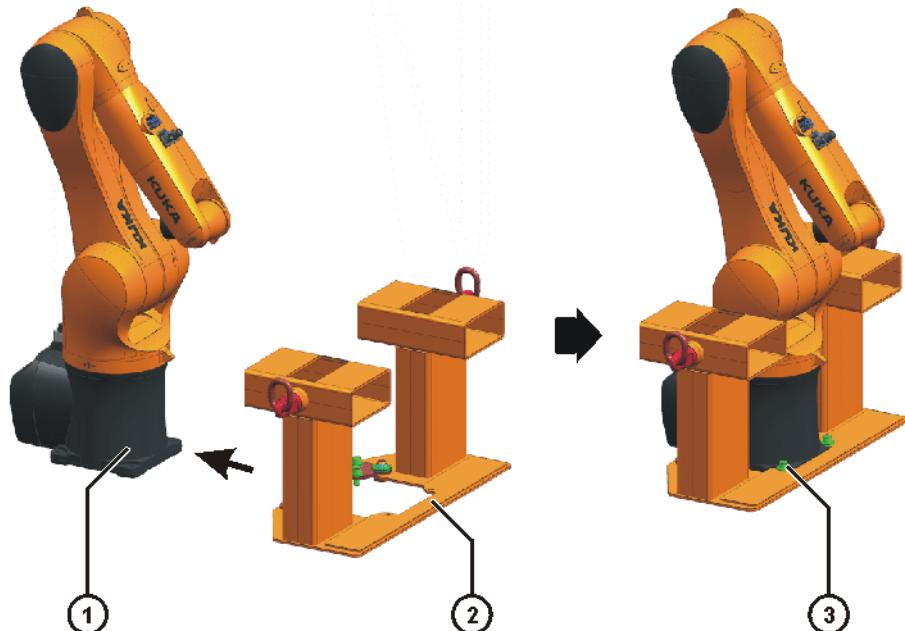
Pushing on the Load Lifting Attachment and fastening it at the front
